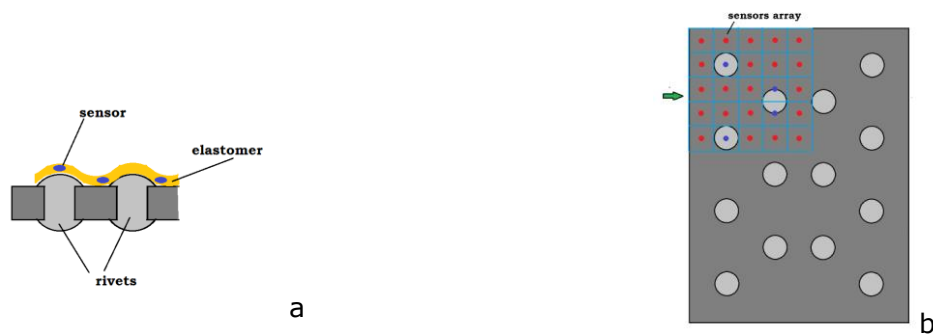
Experimental set-up: a) the concept of sensors array for testing rivets; b) the design of simulation
